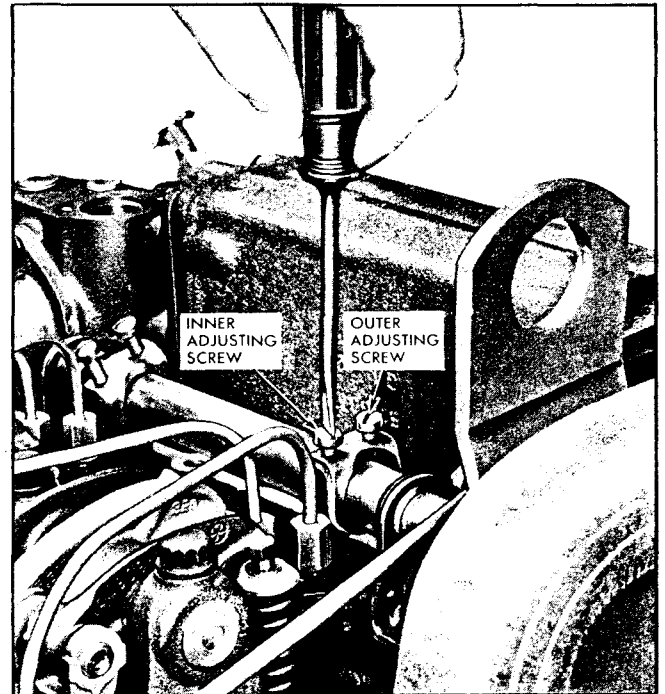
Adjusting Height of Rack Control Lever Adjusting Screws
